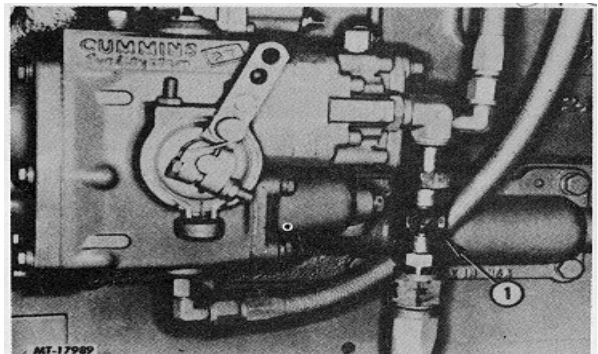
Check ins air leaks with ST998 Sight Gauge
